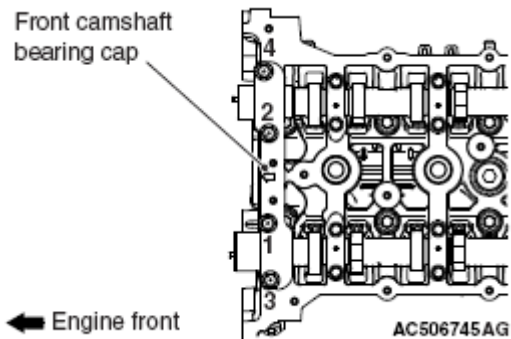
Identifying Front Camshaft Bearing Cap Mounting Bolts Loosening Sequence
